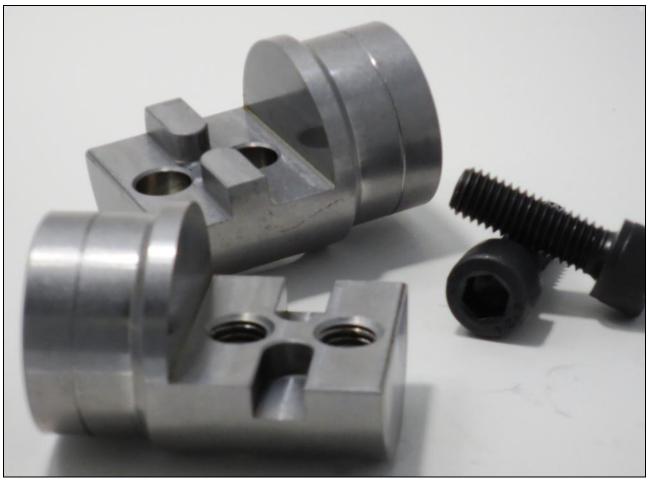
Billet Race Craft 1 5/8" Joint – ANDRA RRJ002 etched and non-etched.
